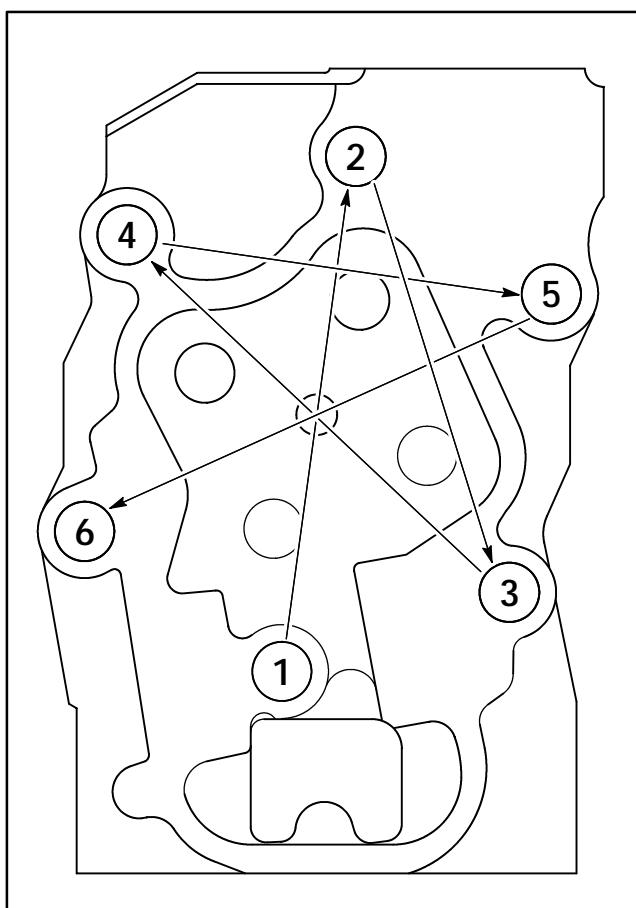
Cylinder Head Bolt Tightening Sequence - Top View
